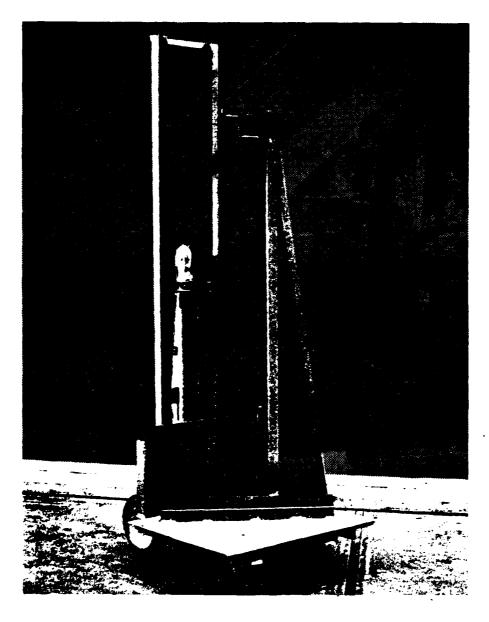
Elevation Axis Motor and Worm Gear Drive Assembly.
